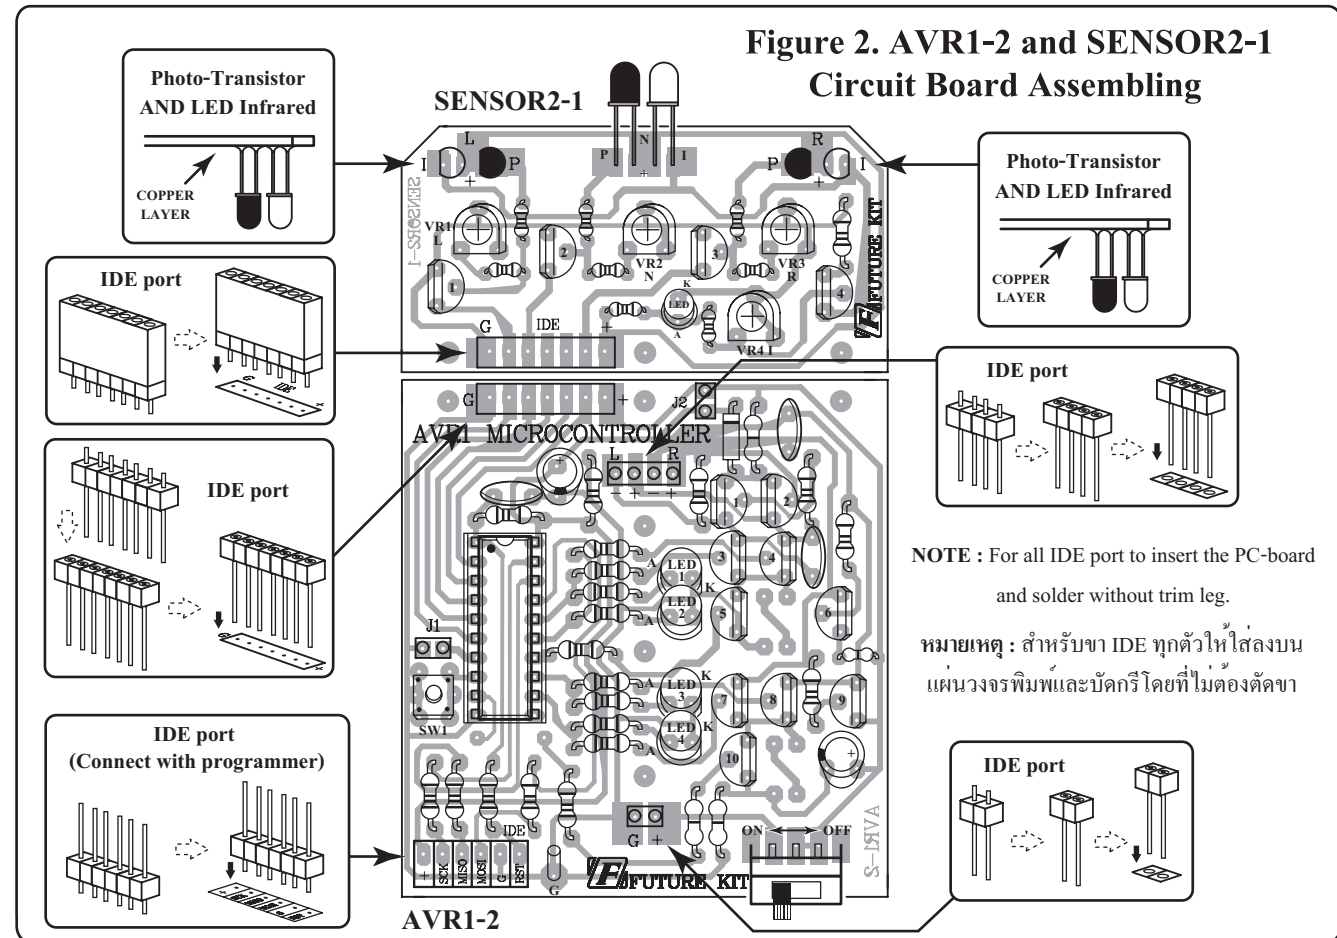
AVR1-2 and SENSOR2-1 Circuit Board Assembling
